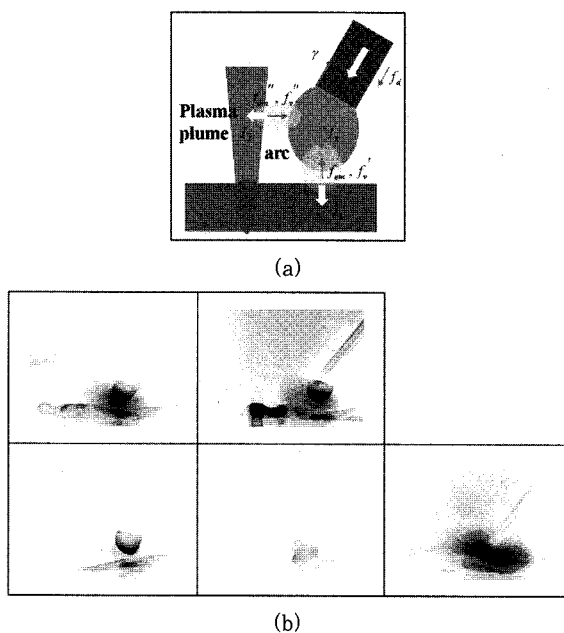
(a) Physical model of pulsed laser-dip-transfer DC GMA hybrid welding, (b) high speed camera images for hybrid welding using pulse control technique
